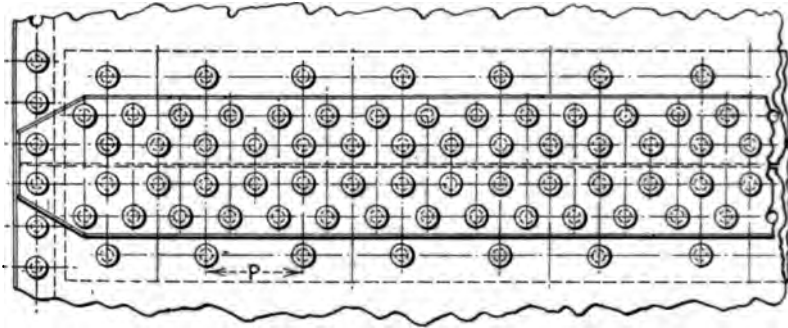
EXAMPLE OF BUTT AND DOUBLE STRAP JOINT, TRIPLE-RIVETED
